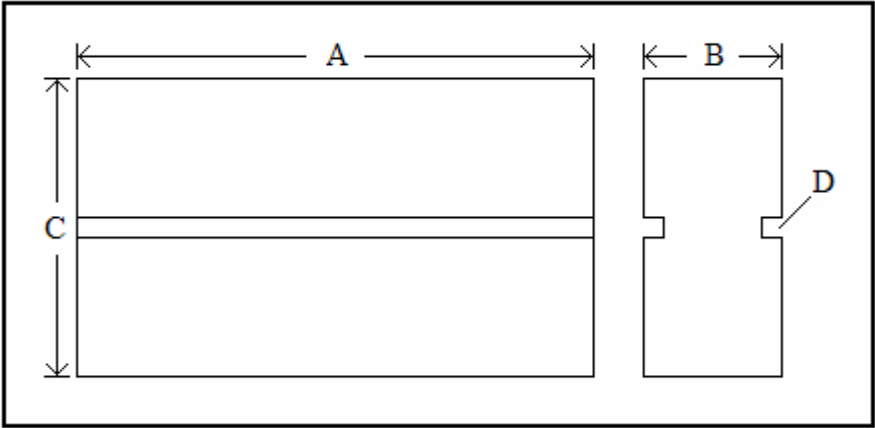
Detailed drawing of PVD coated profile grinding block
